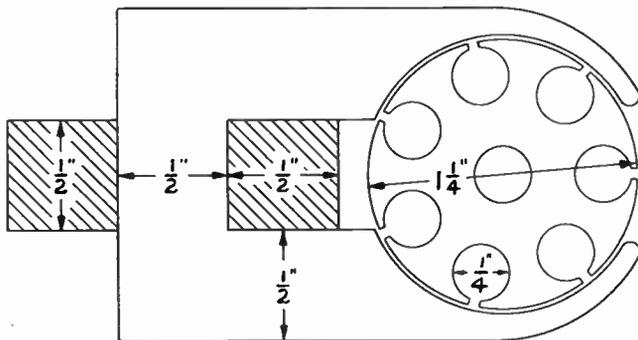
PRINCIPAL DIMENSIONS OF THE SMALL 6-VOLT MOTOR.
